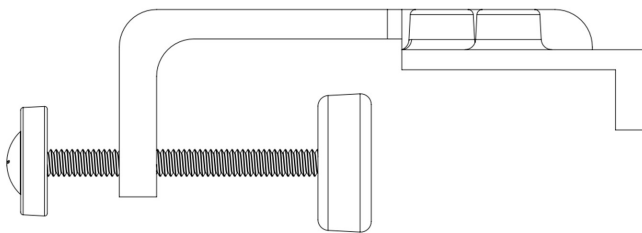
Side View of Assembled C-Clamp Arm and Carriage Bolt
